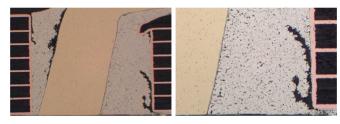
SnPb Solder, ImAg Surface Finish with Au/Ni Pin Finish, 0.05% Ni Contamination, Did Not Fail
